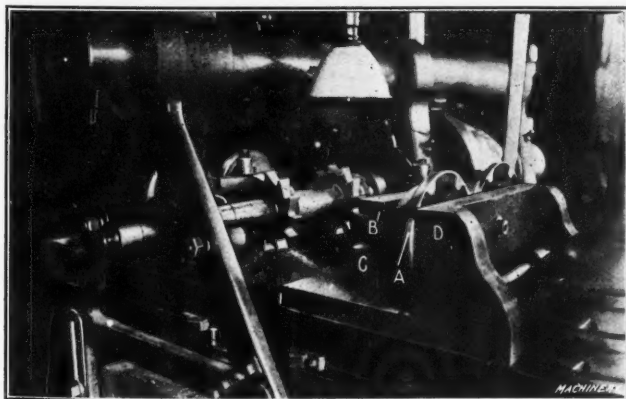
Reciprocal Milling Attachment for machining the Slot in Desk Fan Bases
